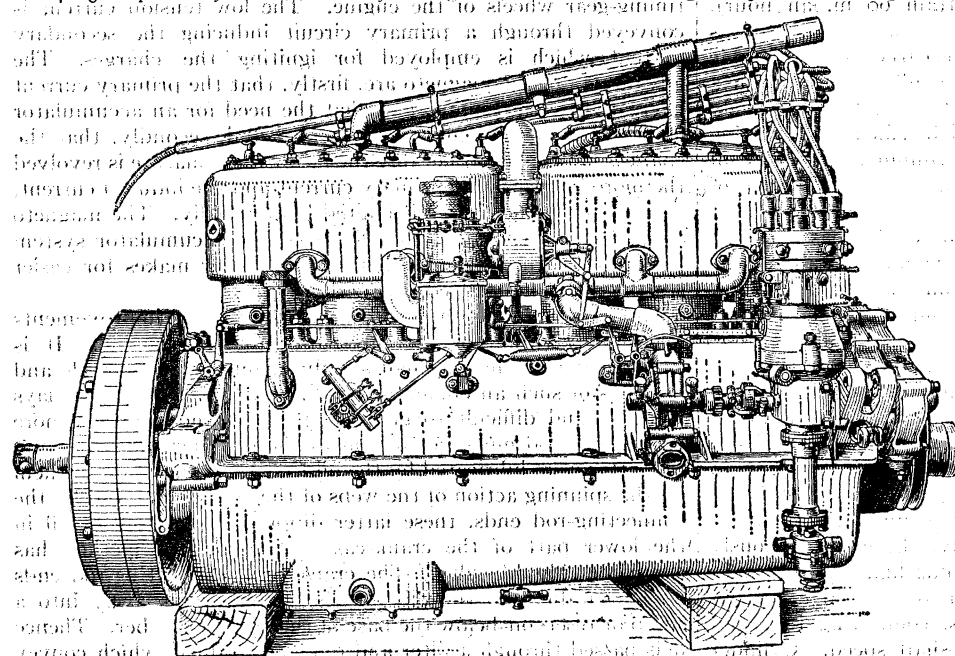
The 40-50 h.p. Six-cylinder Rolls-Royce Engine (carburettor side, showing also high-tension distributor, and position of centrifugal water pump).
